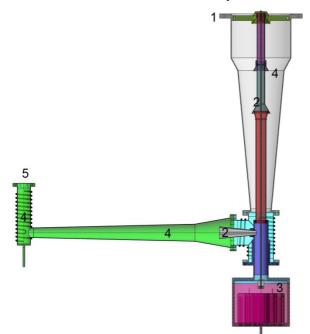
Drawing of the booster pump. (1= Inlet, 2=Nozzle stock, 3=Mercury boiler, 4=Pump case with surface cooling, 5=Outlet)
